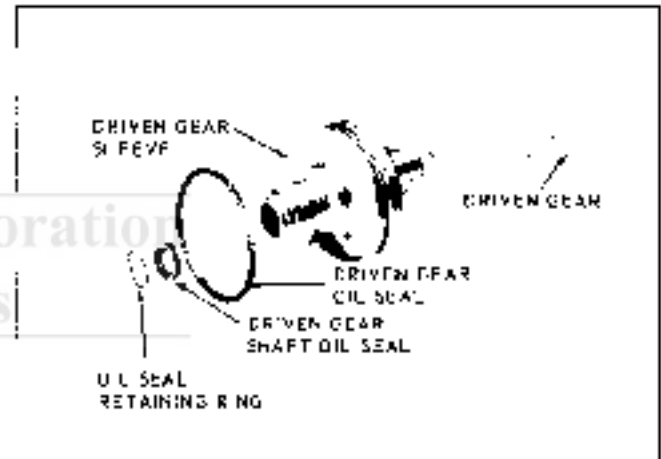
F-17 Speedometer Driven Gear and Sleeve
